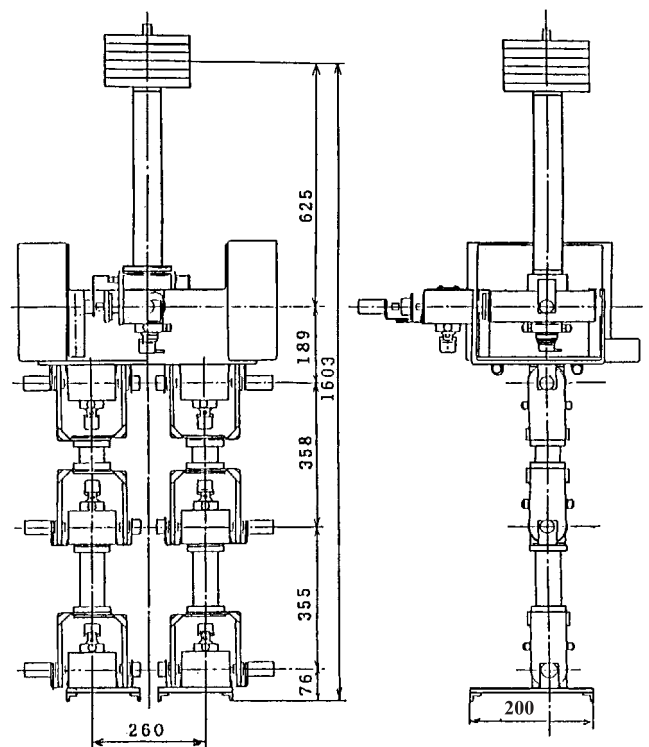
Assembly drawing of WL-12RIII. The height of the robot is 1.6 m, and the total weight is 103 kg.
